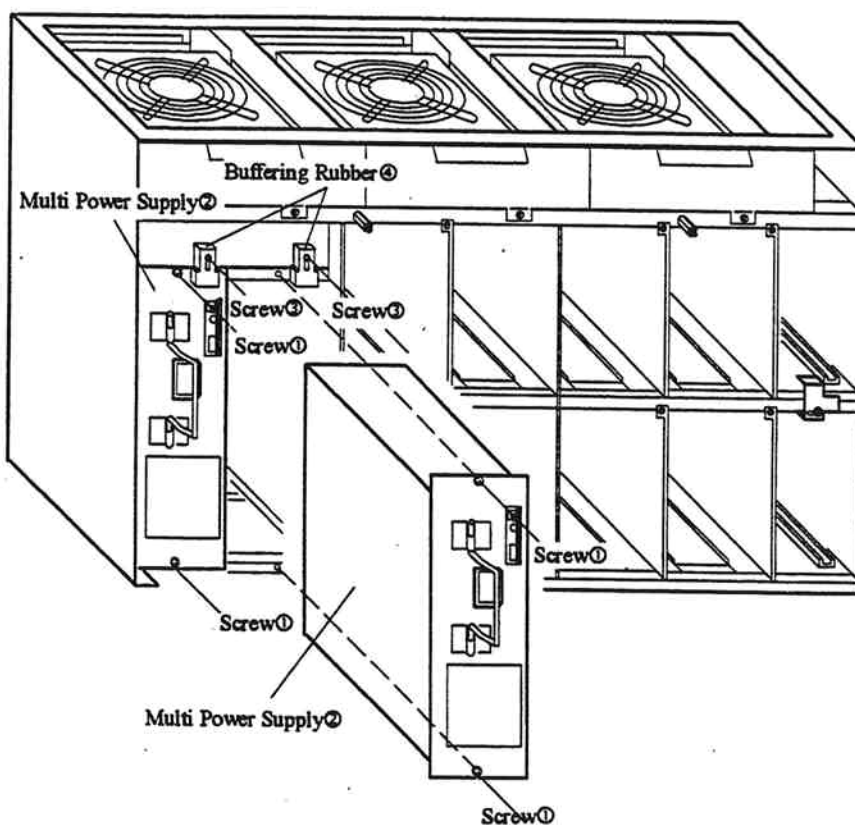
Removal of the Multi Power Supply
